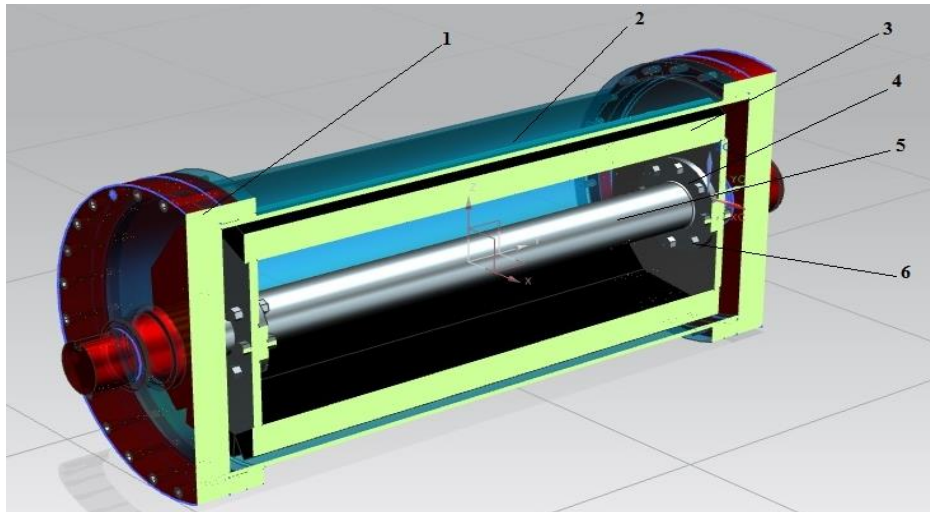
Magnetic drum section 1 - Drum cover, 2 - drum housing, 3 - magnets, 4 - welded flange, 5 - fastening screws
